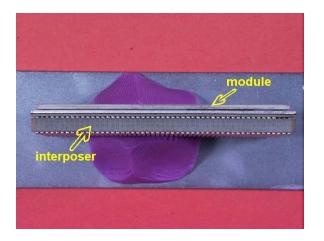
This is a picture of the 52.5mm FCPBGA-HP module / interposer assembly test vehicle.
